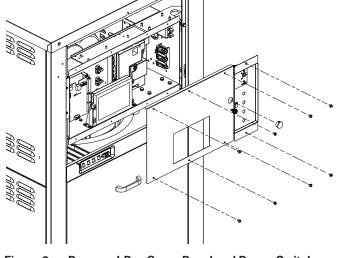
Remove J-Box Cover Panel and Power Switch Panel
